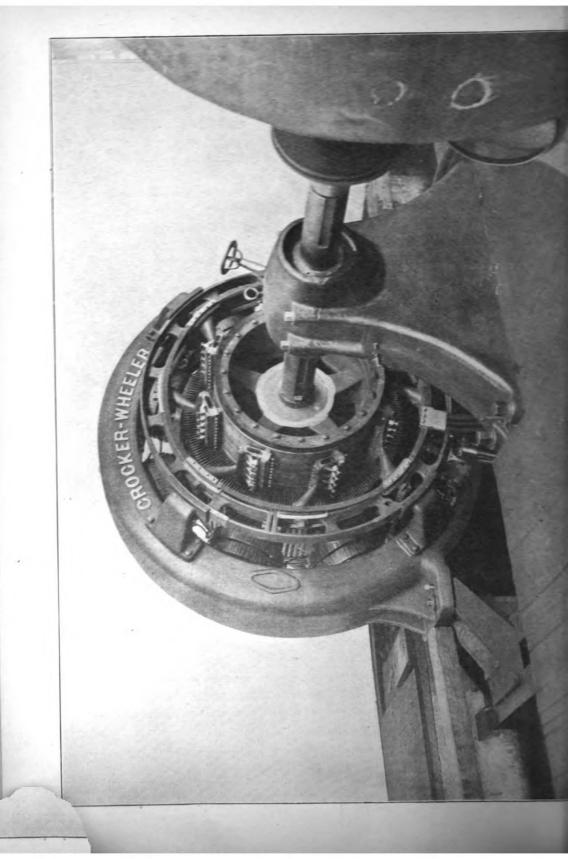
Ball-Bearing Mounting for Horizontal Motor-Shaft.
